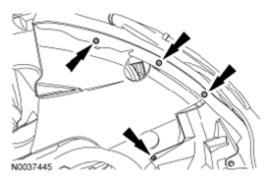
Locating RH Fender Splash Shield Mounting Screws Courtesy of FORD MOTOR CO.
